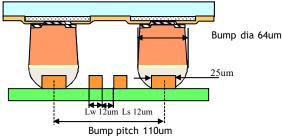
Bump pattern, and Cu pillar bump dimension detail w/ BOL pad
